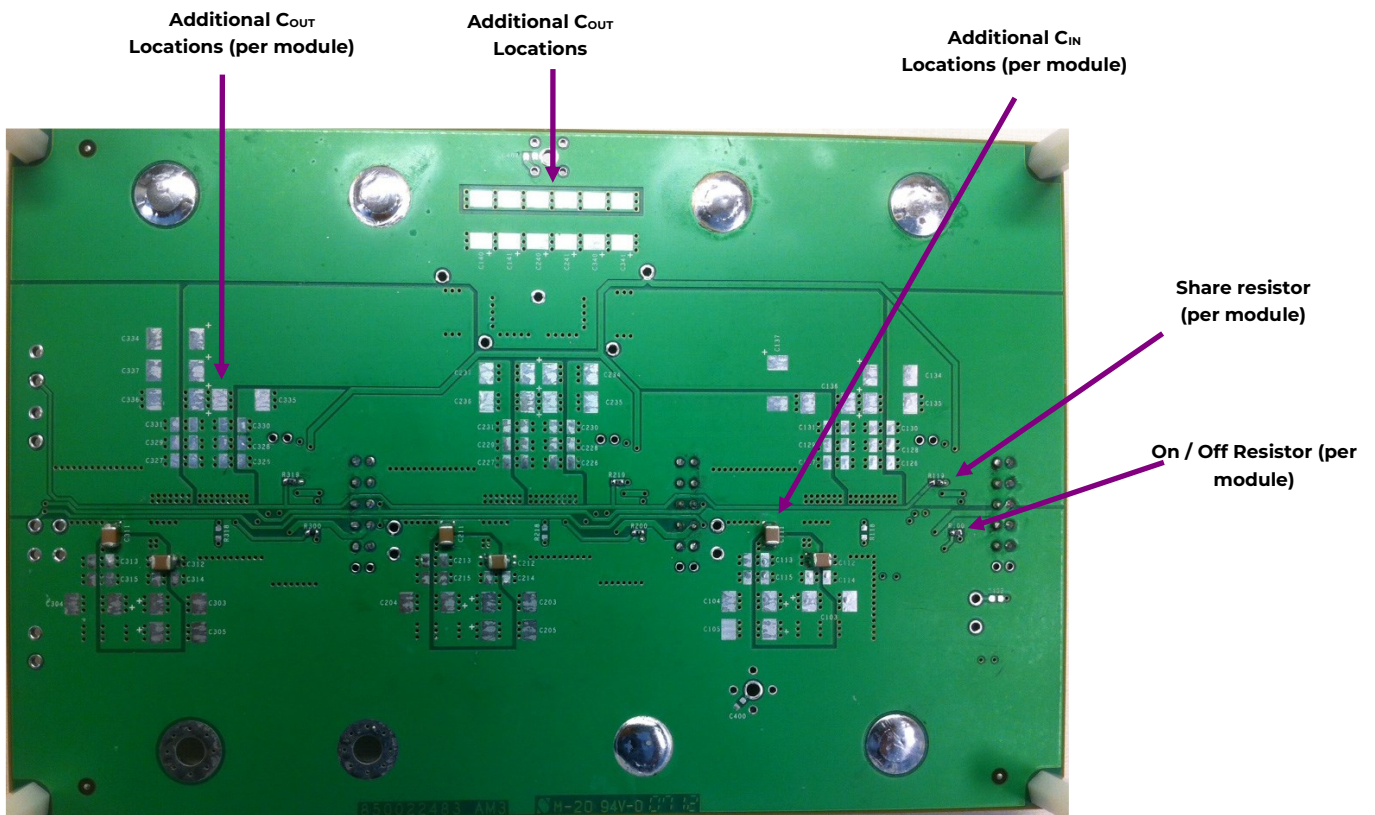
Bottom View MegaDlynx™ Paralleling evaluation board
